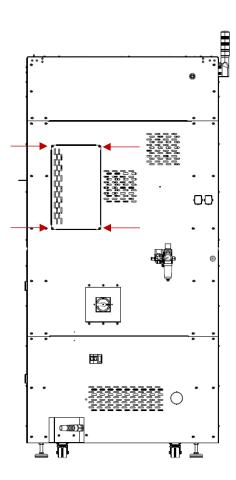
Marking of the 4 screws of the rear inspection cover to be unscrewed
